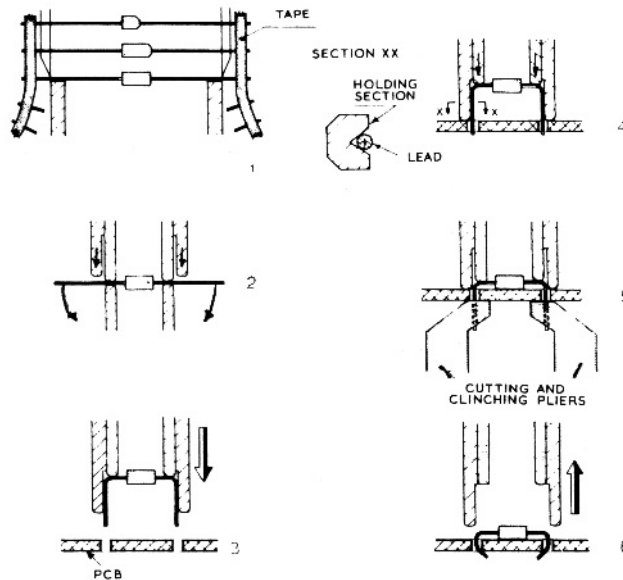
Simplified process in the axial inserter: a): Cutting the components from the tape, b): Lead bending, c) - d): Insertion, e): Cut and clinch, f): Return to starting position.
